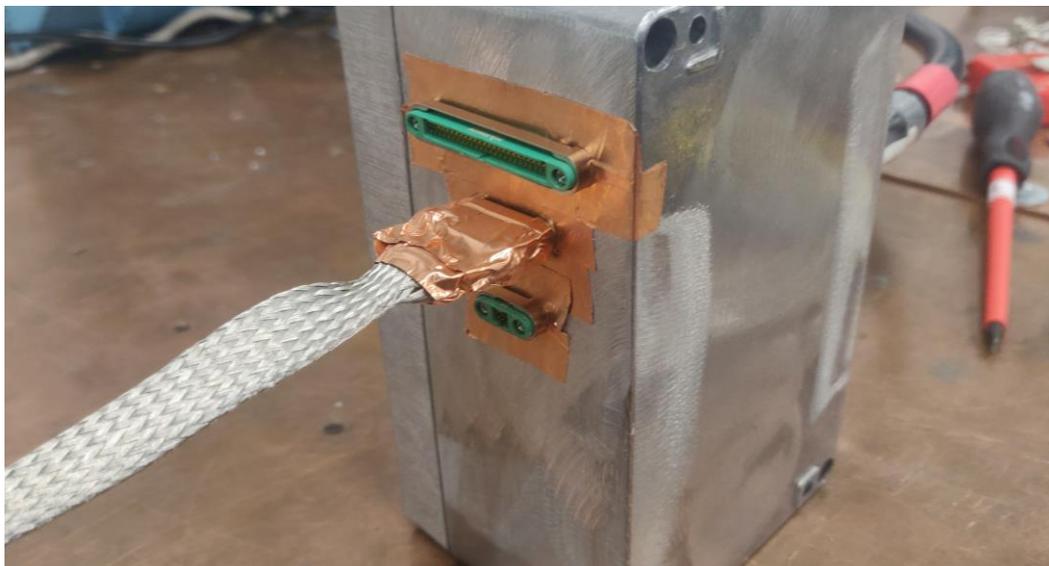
Copper Screening on the Back shells: 16-way cable assembly
